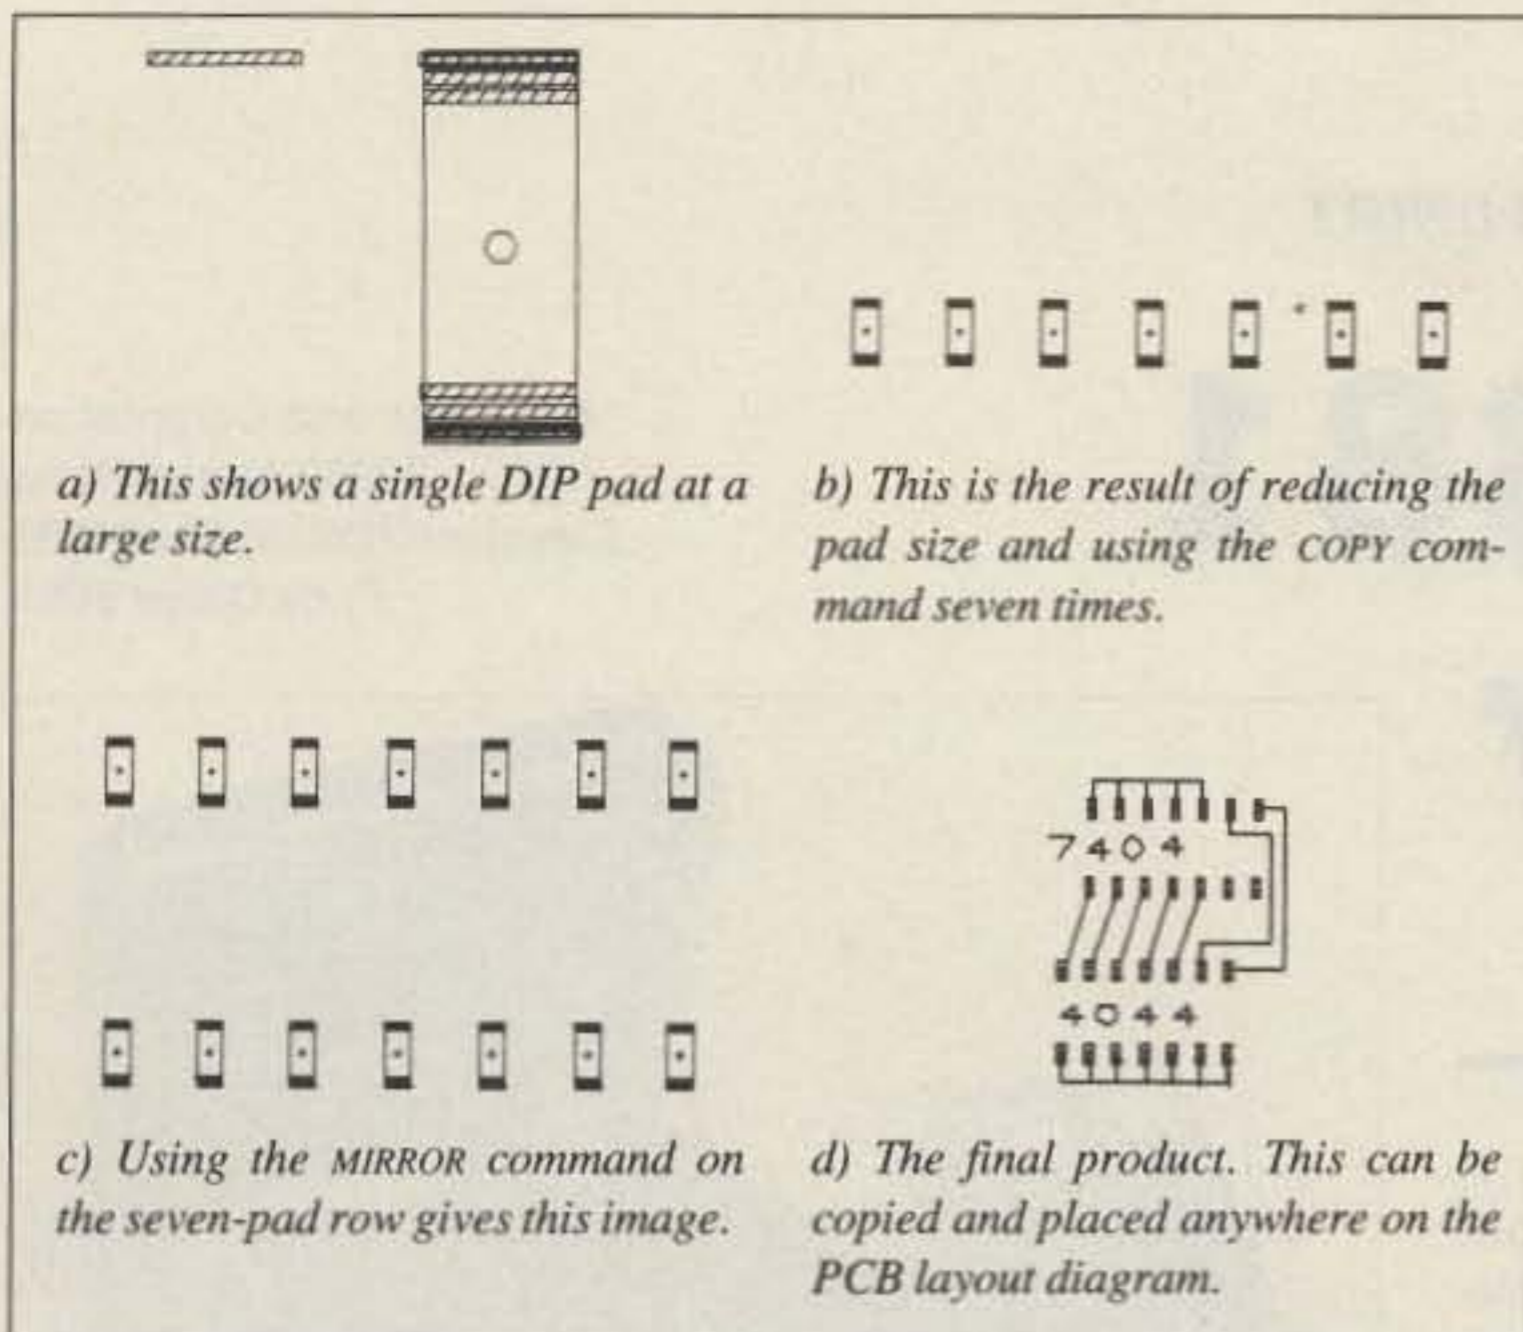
Using AutoSketch to draw a 14-pin DIP socket for PC board layout.
